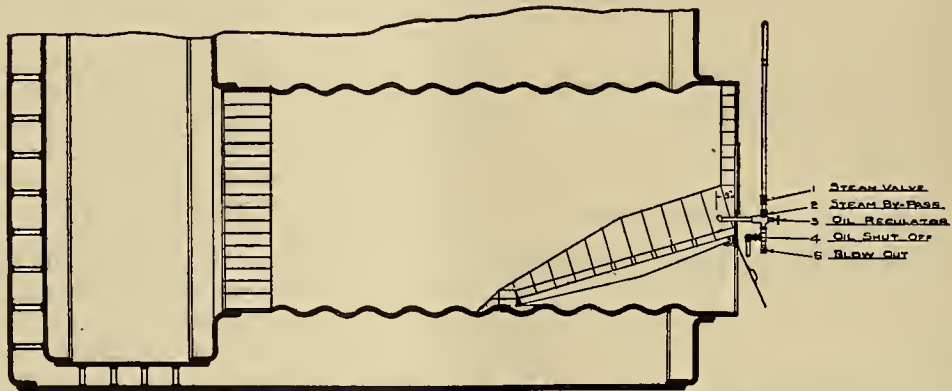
Longitudinal View of Burner Arrangement for Scotch Marine Boiler.
